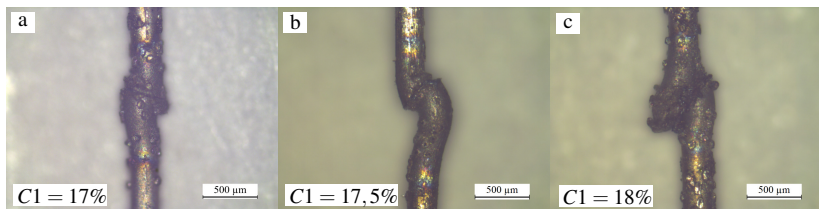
Welds performed with parameters a) PT1, b) PT2 and c) PT3 (Table 11).
